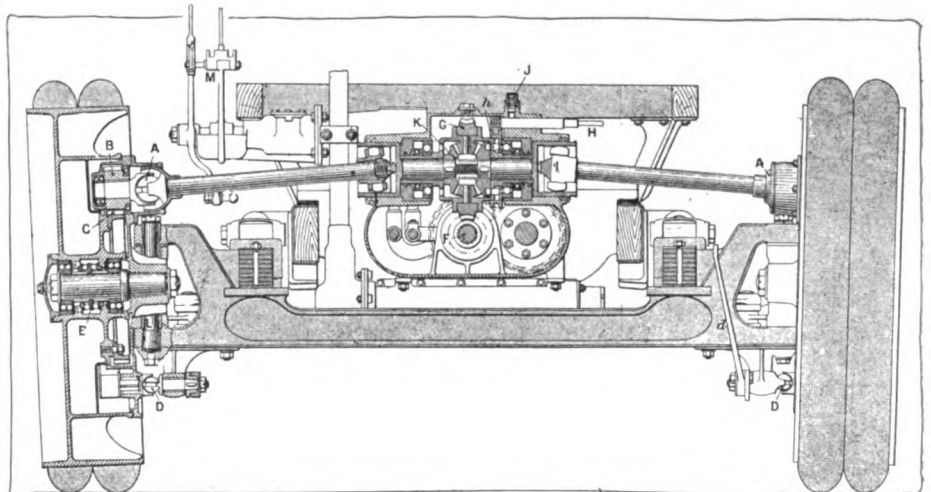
Section of transmission; similar in front and rear. A, universal; BC, reduction gear; D, universal for brake; F, longitudinal drive shaft; G, worm gear for winch drive; H, lever for locking differentials with lugs h; K, differential; M, gear lever and quadrant
